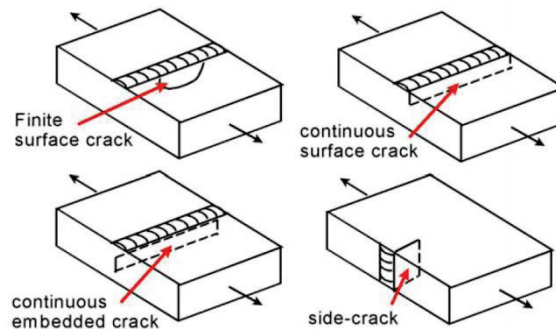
Different types of cracks to a weld toes (Hobbacher 2013)
